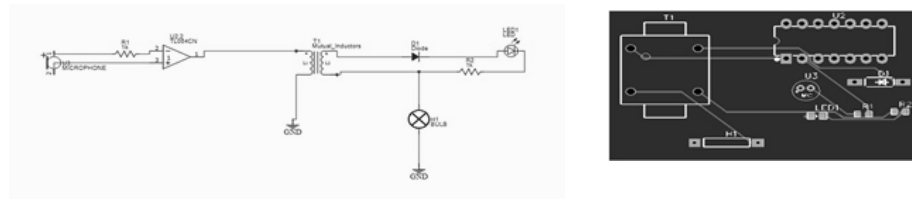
Schematic View and Printed Circuit Board Assembly (PCBA)
